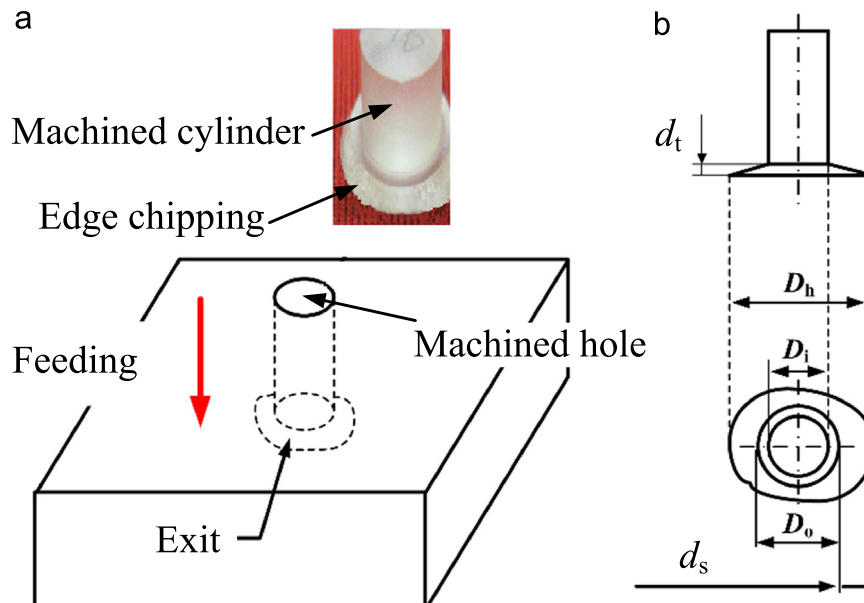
Illustration of (a) a machined hole and (b) measurement of an edge chip.
